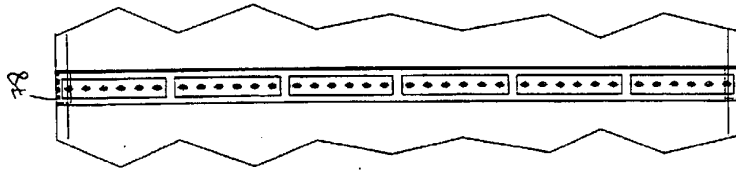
GRATE PLATE HEADER ASSEMBLY PLAN VIEW
